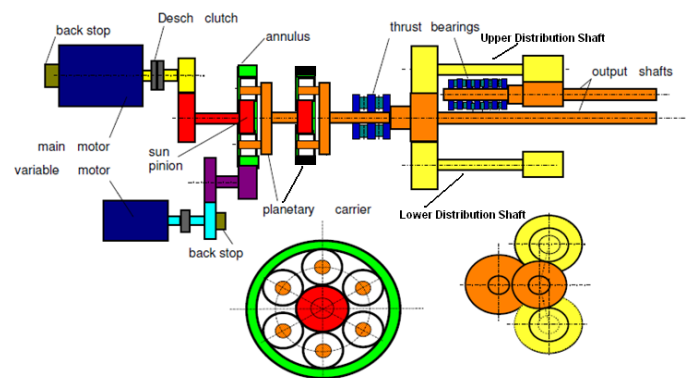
Extruder's Motor - Gearbox Schematic Diagram
